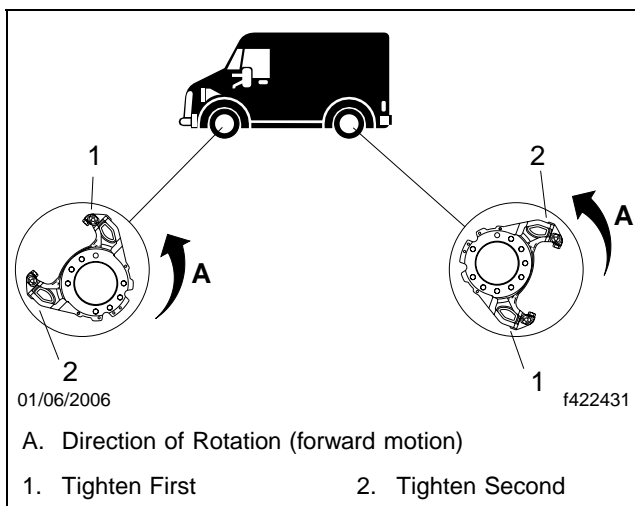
, Tightening Sequence for Caliper Mounting Bolts, Left Side
